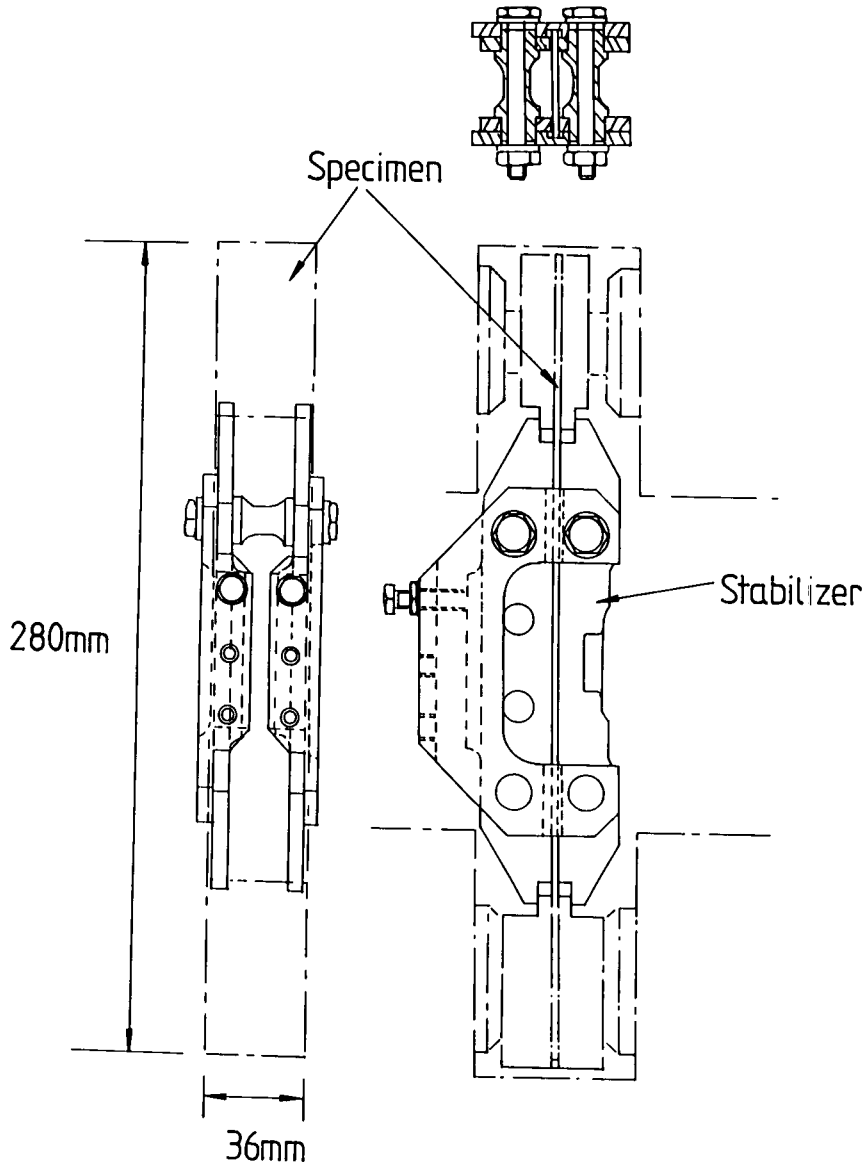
Stabilised compression specimen with a multi-angular (0/±45/90) fibre orientation.
